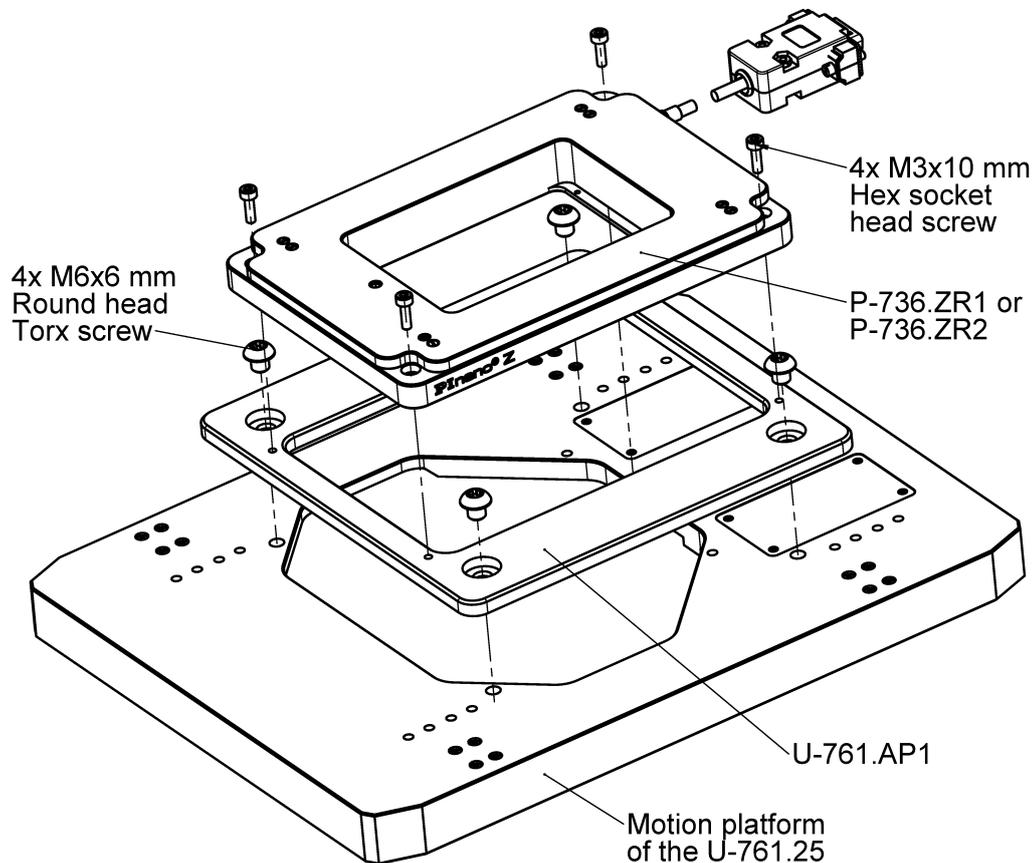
Mounting of the P-736.ZRx onto a U-761 stage using the U-761.AP1 adapter plate
